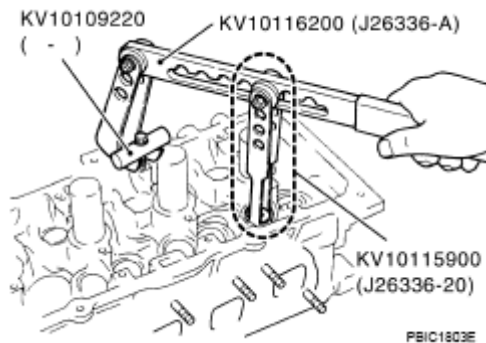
Compressing Valve Spring With Valve Spring Compressor
